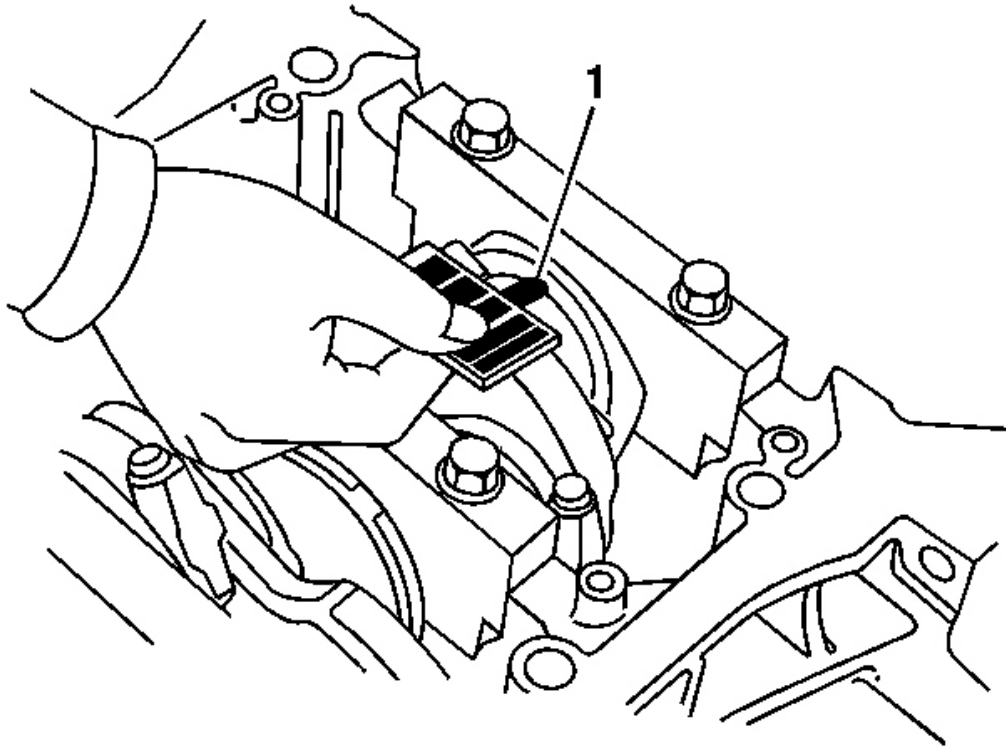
Measuring The Widest Part Of The Plastic Gaging Material
